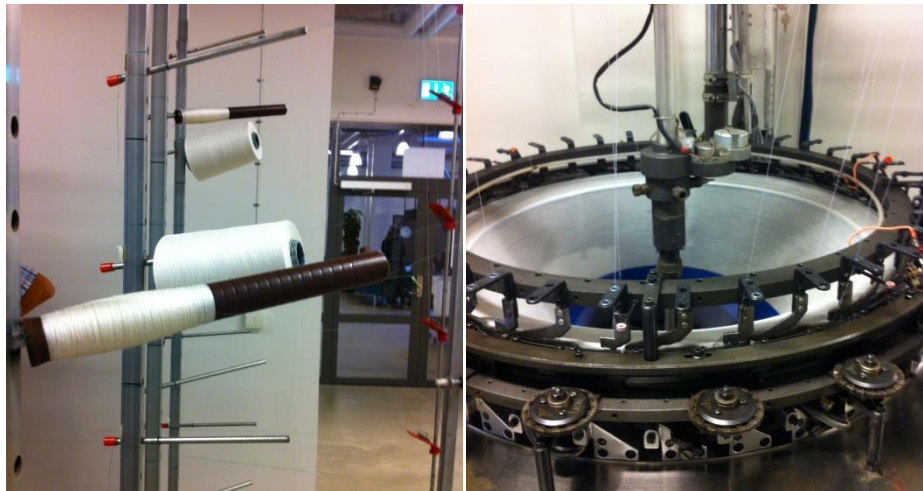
Left: one bobbin in the creel. Right: fabric produced in Camber Velnit circular knitting machine.
